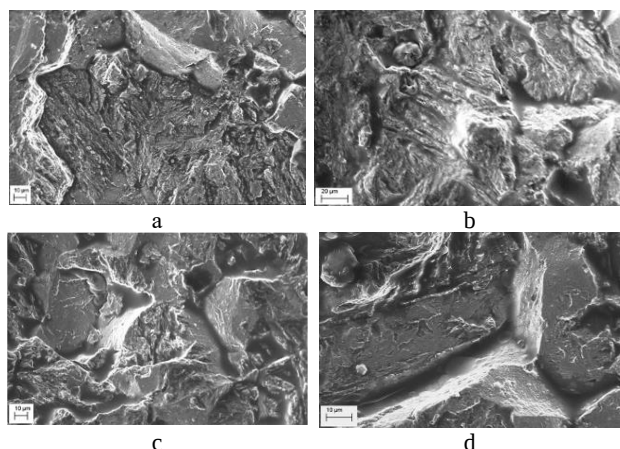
Peculiarities of the fractures surface relief in the centers of initiation of blades fracture from their convex surface.
